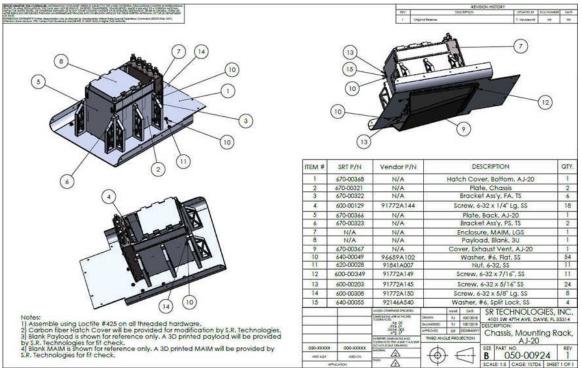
Jump-20 Primary Mount Assembly Drawing
